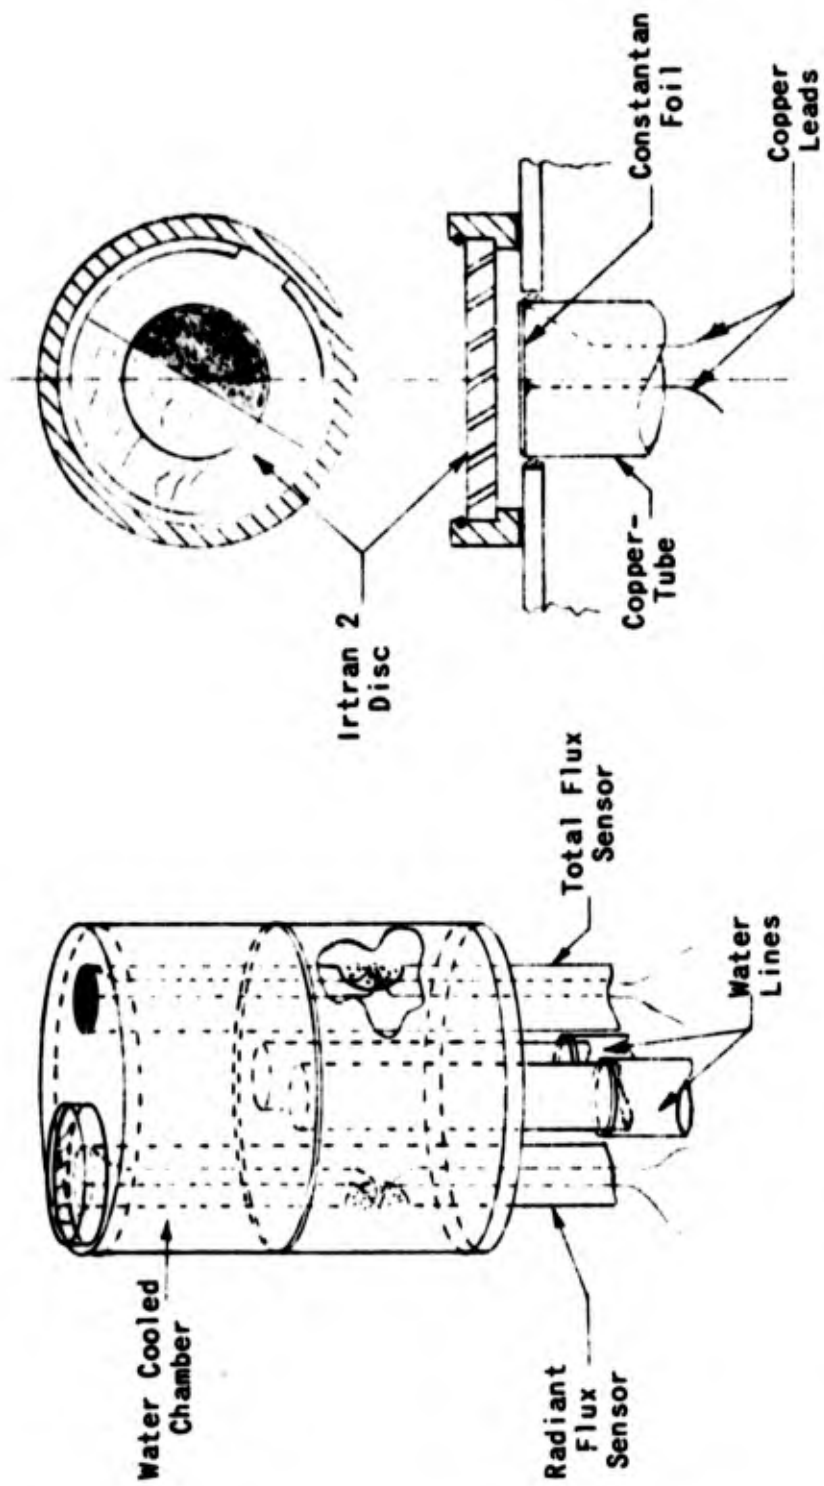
CONSTRUCTION DETAILS OF DUAL ELEMENT CALORIMETER
